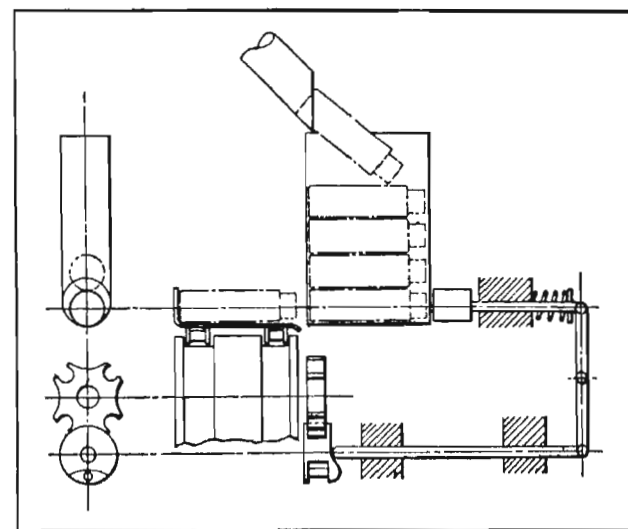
Arrangement for Feeding Boxes Intermittently on Belt Conveyor.
